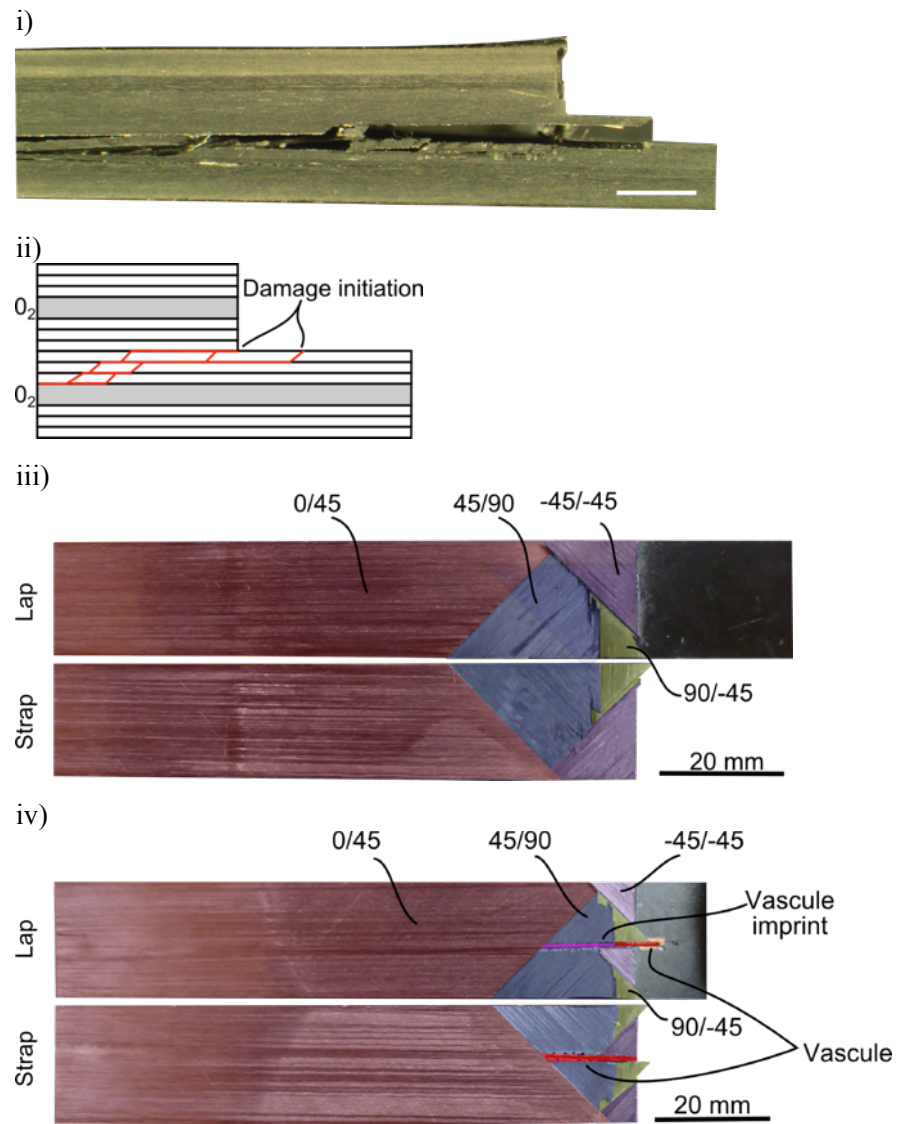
Damage surfaces i) Edge view, ii) Schematic of the edge view. Overhead view of the fracture surfaces for iii) the baseline and iv) vascularised specimen.
